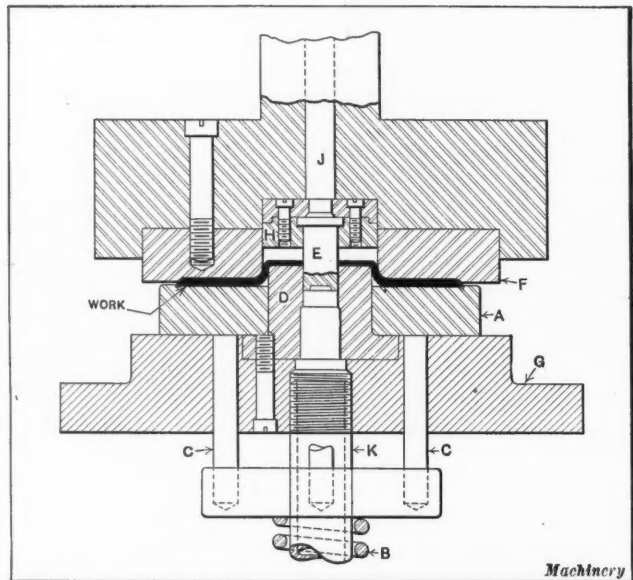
Piercing and Drawing Die employed to produce Hub on Plate illustrated in Fig. 1
